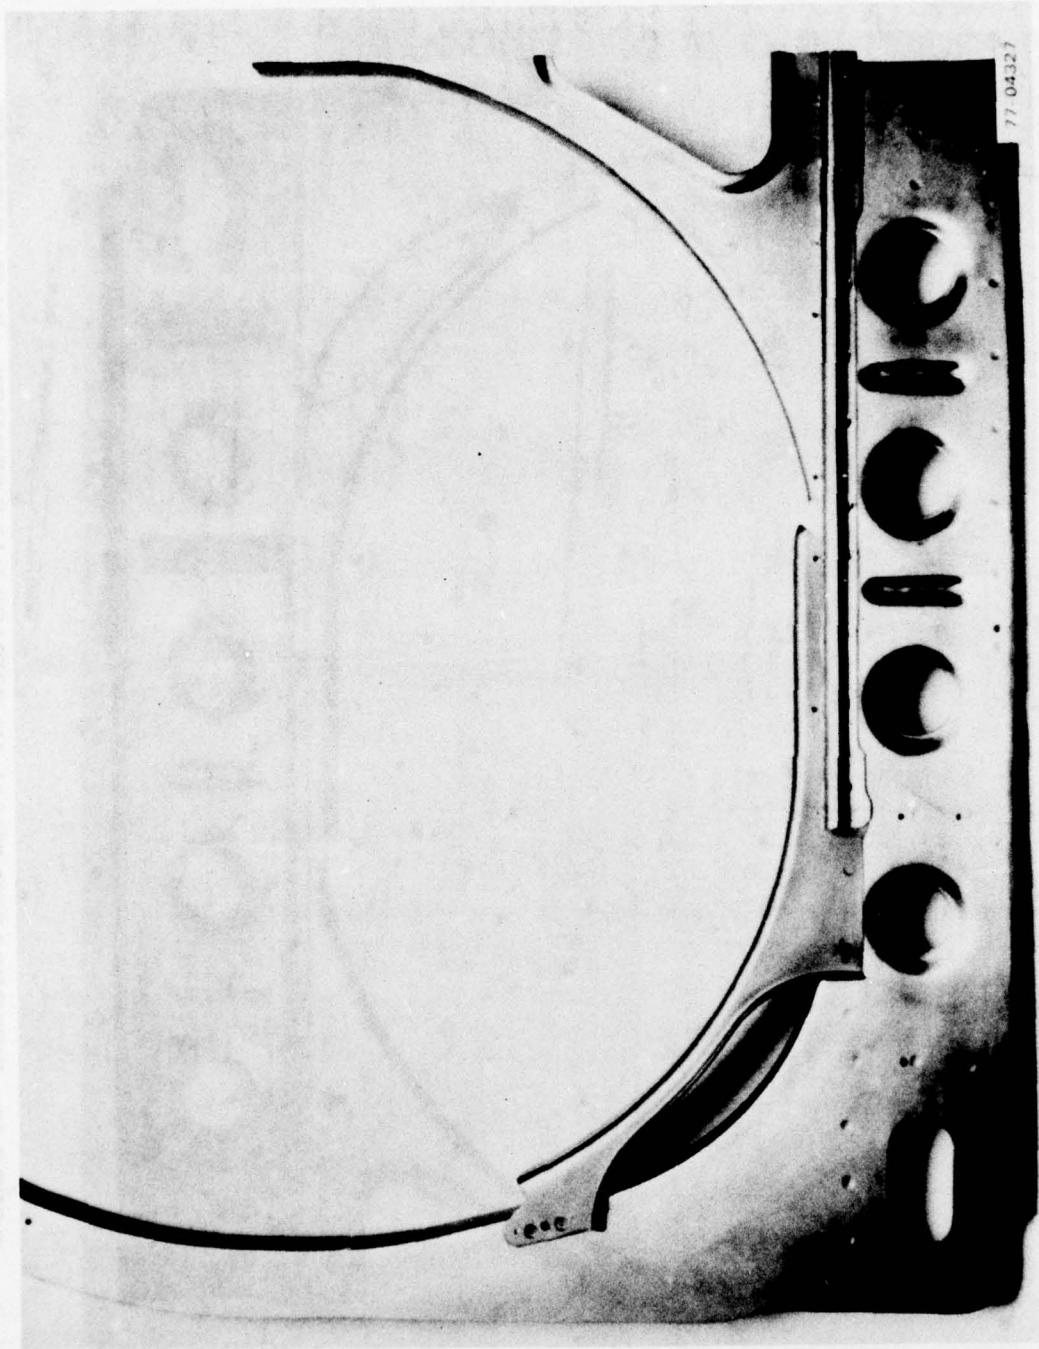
WELDBRAZED TI-6AL-4V FORMER HALF SECTION - FRONT SURFACE
